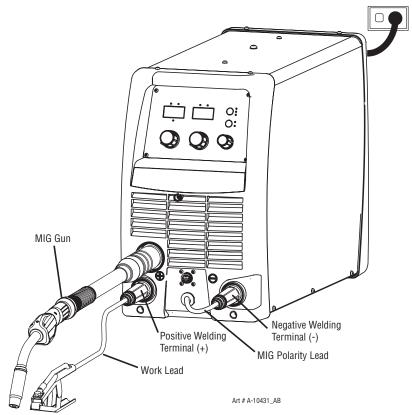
Setup for MIG Welding with Gasless MIG Wire
